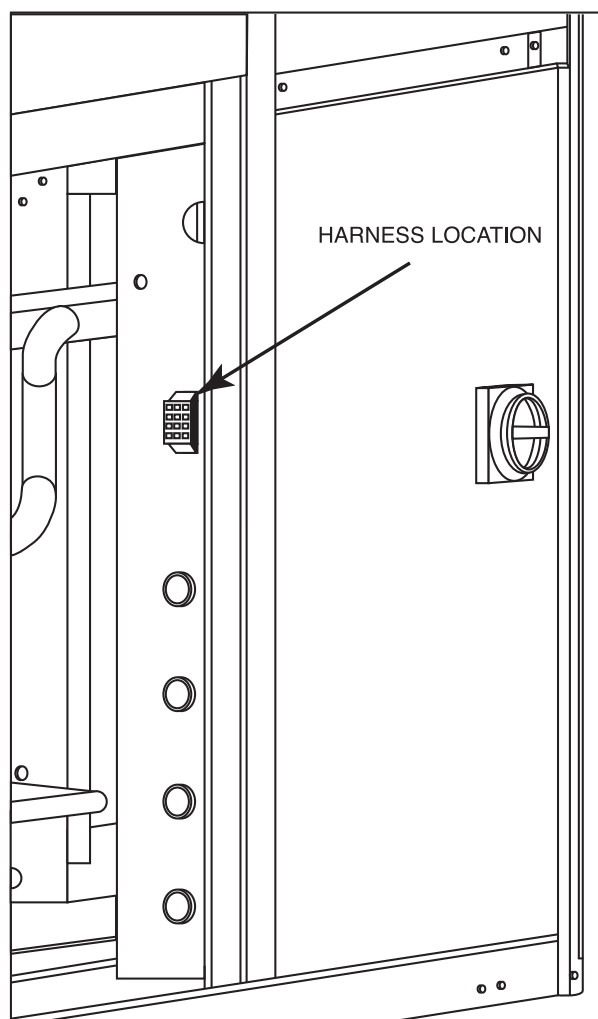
Jumper Plug Location - 50XC12-24 Units
